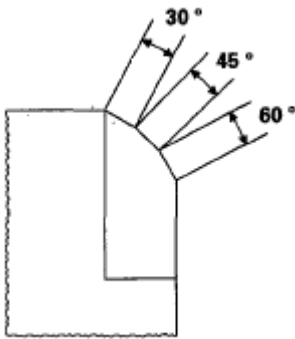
Identifying Bevel Upper Edge Of Seat With 30° Cutter & Lower Edge Of Seat With 60° Cutter
